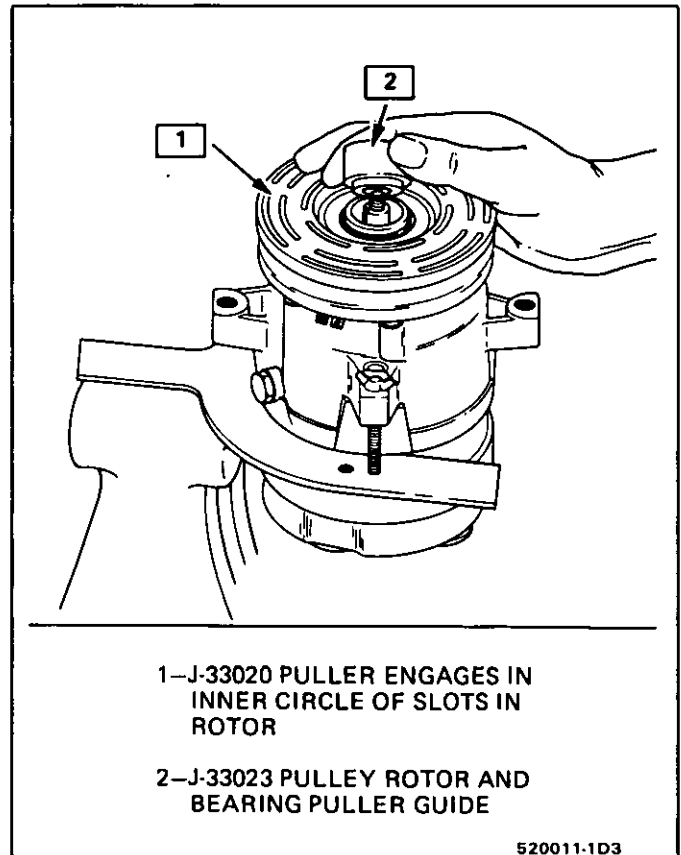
Installing Pulley Rotor/Bearing Puller Guide
